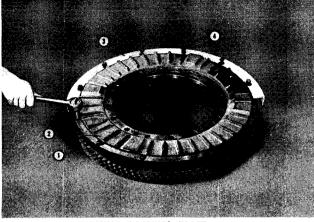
REMOVING BACKING PLATE 1. Retainer Rina 3. Dust Seal 4. Capscrew 2. Backing Plate
